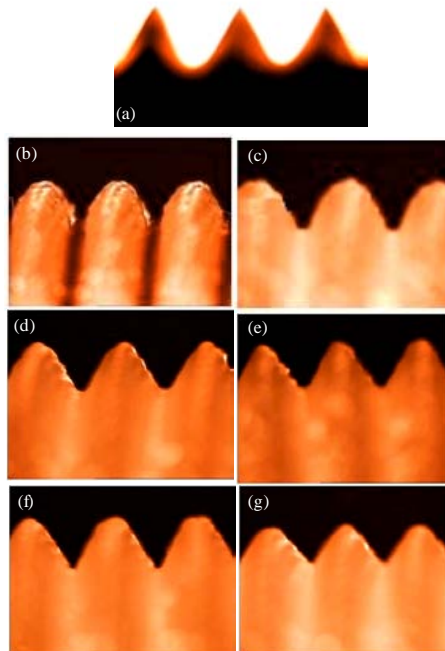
Crimping configurations and dimensions (width/depth) obtained with different winding cords after heat setting: microscopic view (x20), (a): Mandrel thread form (mandrel major-diameter = 20 mm), (b): Copper wire wound on woven tube, (c): Crimping shape obtained with copper wire (3.1/1.6 mm), (d): Crimping shape obtained with fish-hook PP monofilament (2.8/1.6 mm), (e): Crimping shape obtained with three-ply polyester yarn (2.6/1.4 mm), (f): Crimping shape obtained with two-ply polyester yarn (2.7/1.7 mm), (g): Crimping shape obtained with braided polyester yarn (2.4/1.3 mm)
